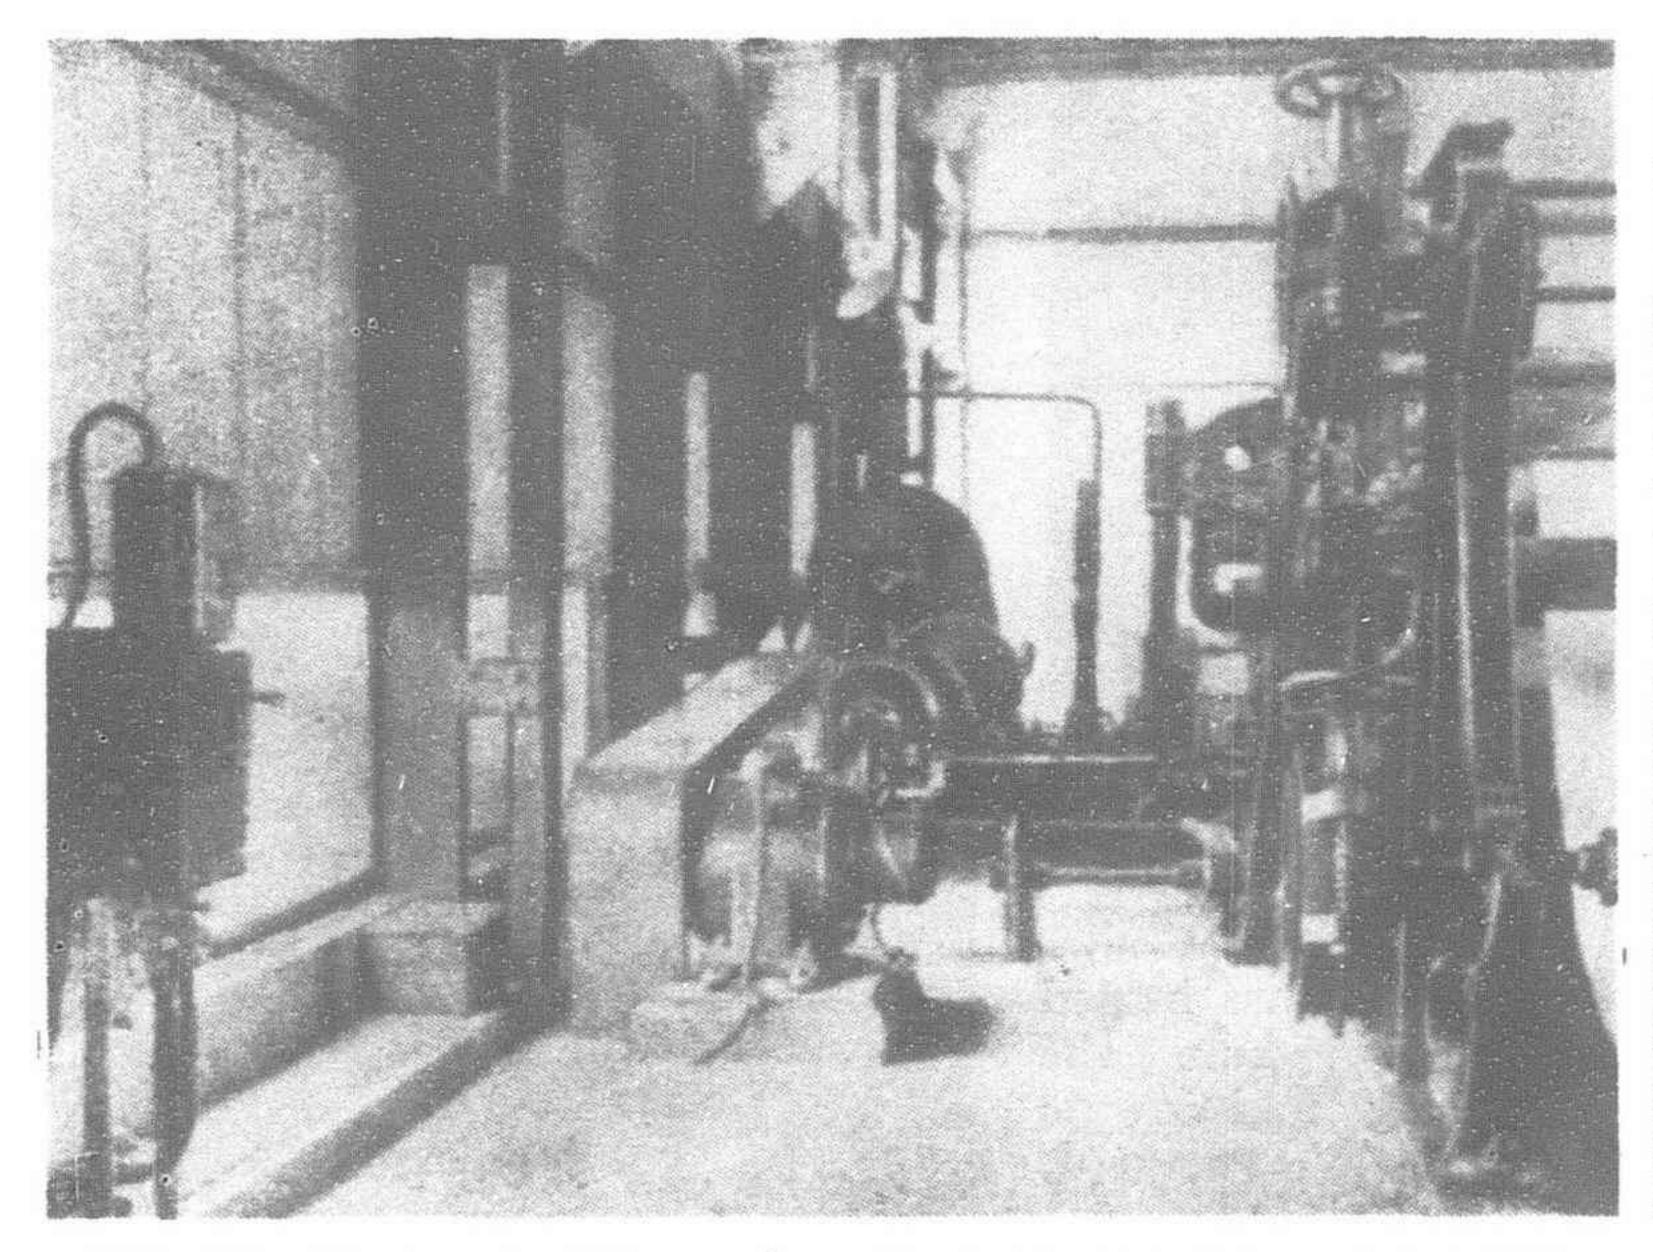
West end of the main mill room with 9 h.p. 1,140/380 r.p.m. slipring motor driving cutting machine
